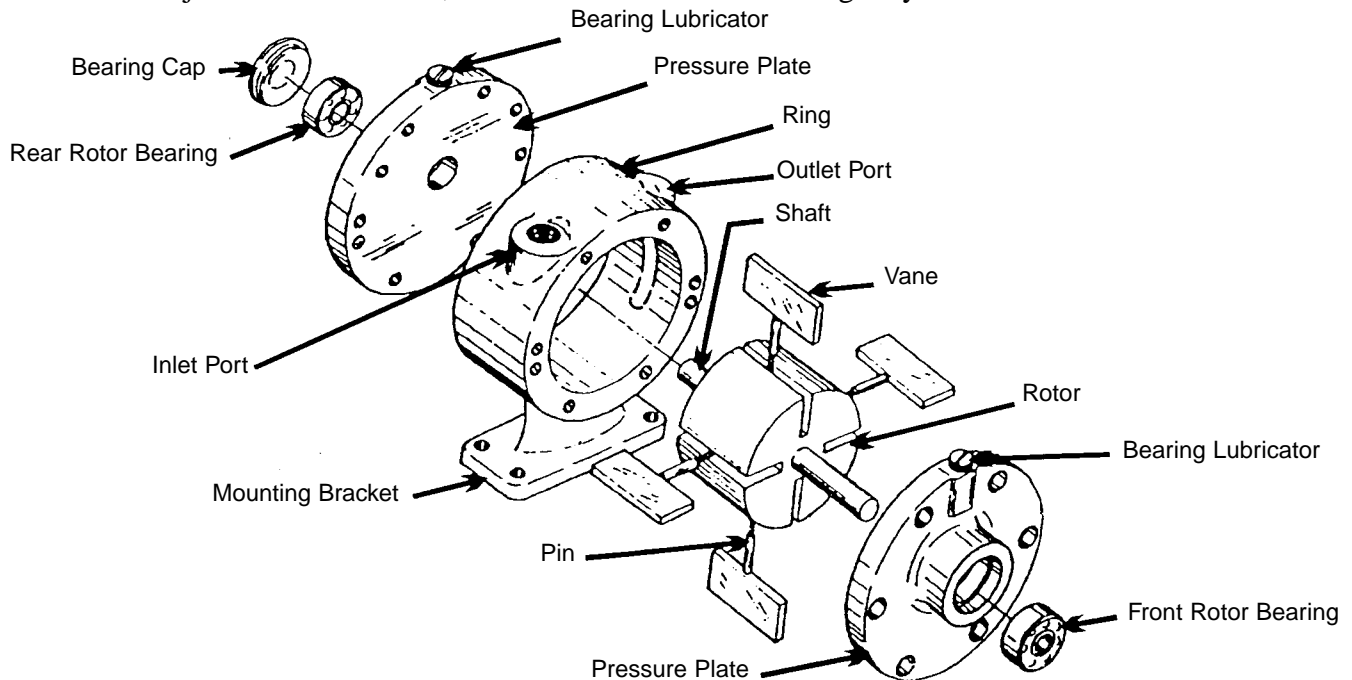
Vane Type Air Motor Construction (Courtesy of Gast Manufacturing Corp.)
